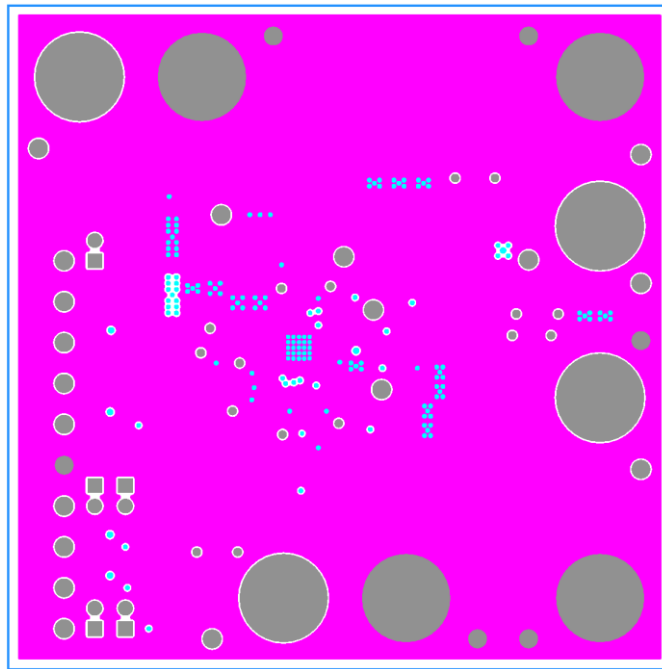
NCV97400GEVB PCB Layout – INNER GND Layer
